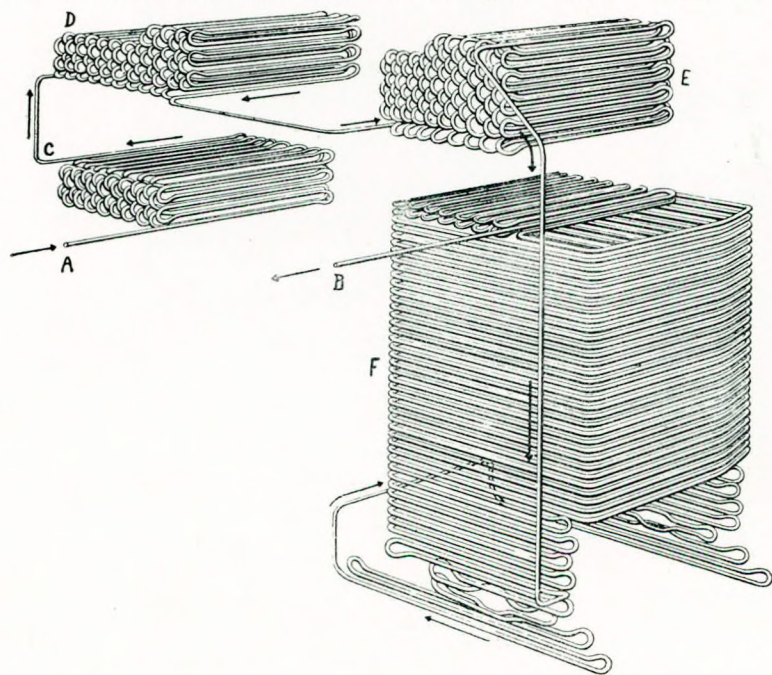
Tube system of "Monotube" steam generator. (A) feed water inlet; (B) superheated steam outlet; (C, D, E) tube bundles which can be arranged to suit space available; (F) tube lining of combustion chamber.
